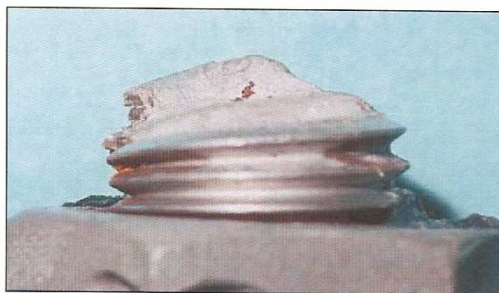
A side view of the pitch change link bolt, demonstrating that the bolt apparently bent prior to failure (magnification: 3,3x).
